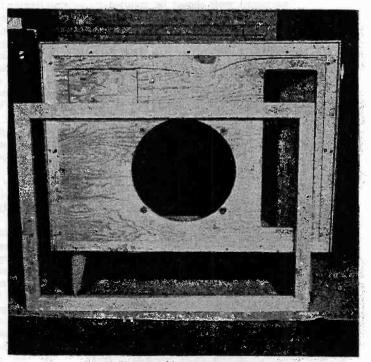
Trim molding frame, after being finished separately, is held by screws into back driven through speaker panel.
